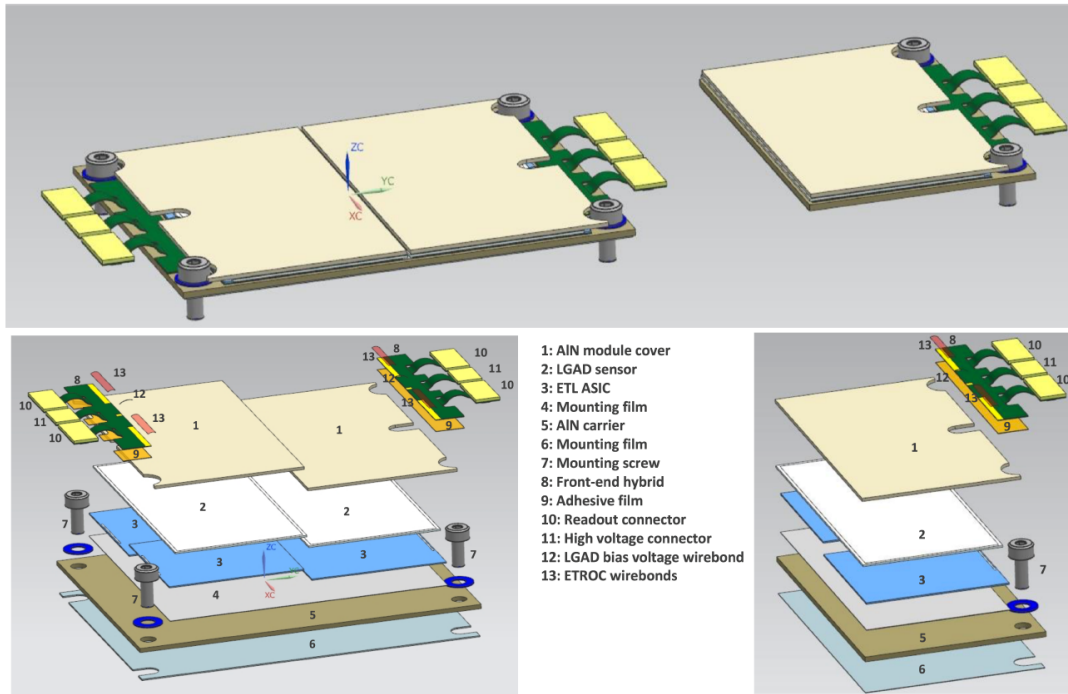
Assembled modules (top), details of each module (bottom) [12].
